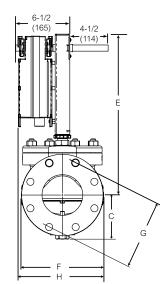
Mx41-634x with 6" Flanged 2-Way Globe Valves
